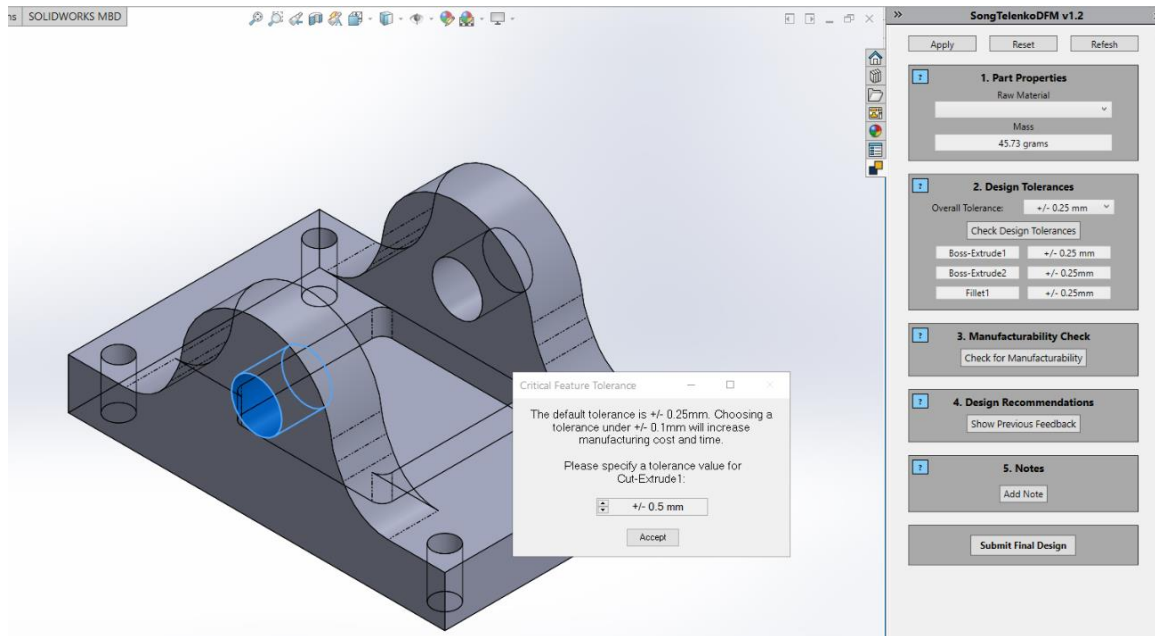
Tolerance Input for the SolidWorks Plug-In
